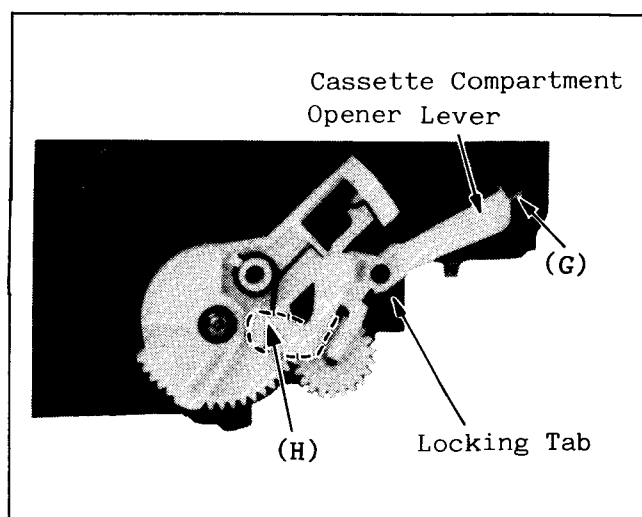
Adjustment of Cassette Up Gears-(10)
